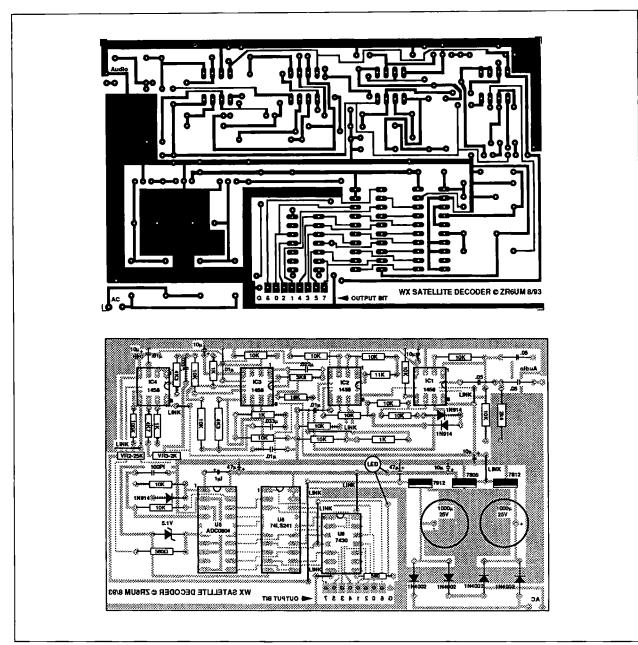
a) Decoder board 1:1 PCB layout. b) Decoder board parts overlay.
